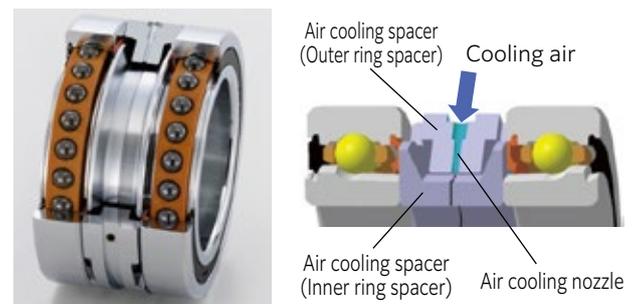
Machine Tool Spindle Bearing with Air Cooling Spacer for Grease Lubrication
